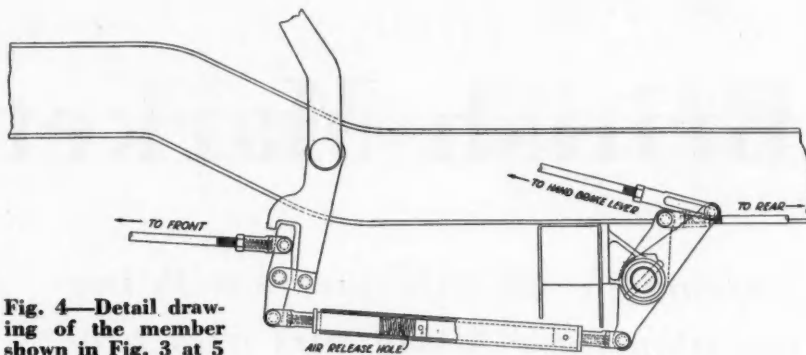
Detail drawing of the member shown in Fig. 3 at 5
